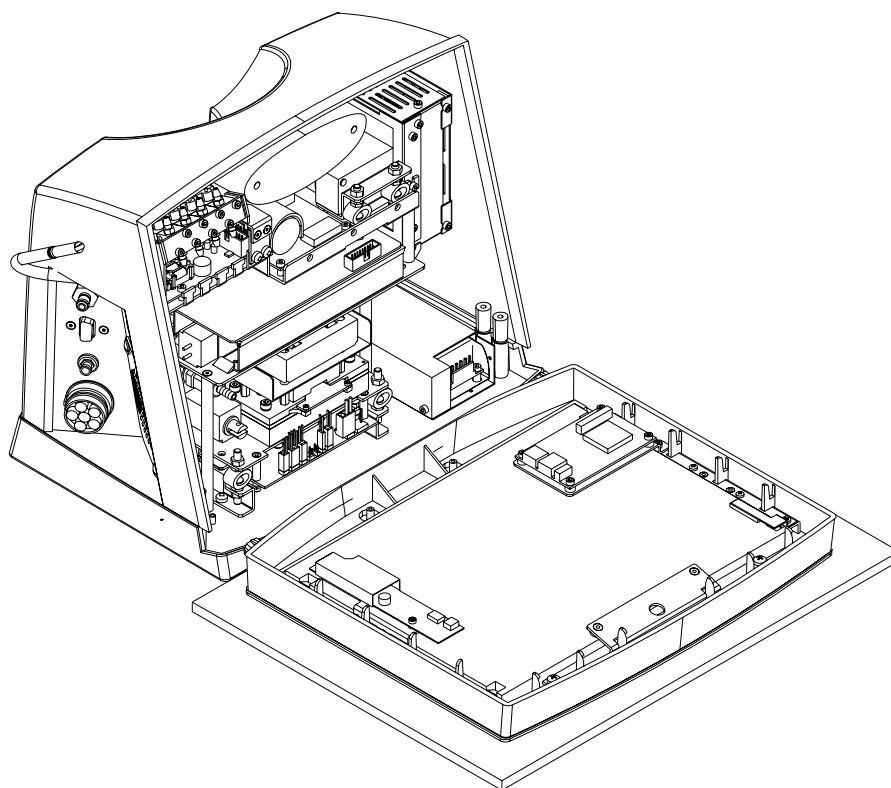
Disassembly cabinet – LCD screen on foam.
